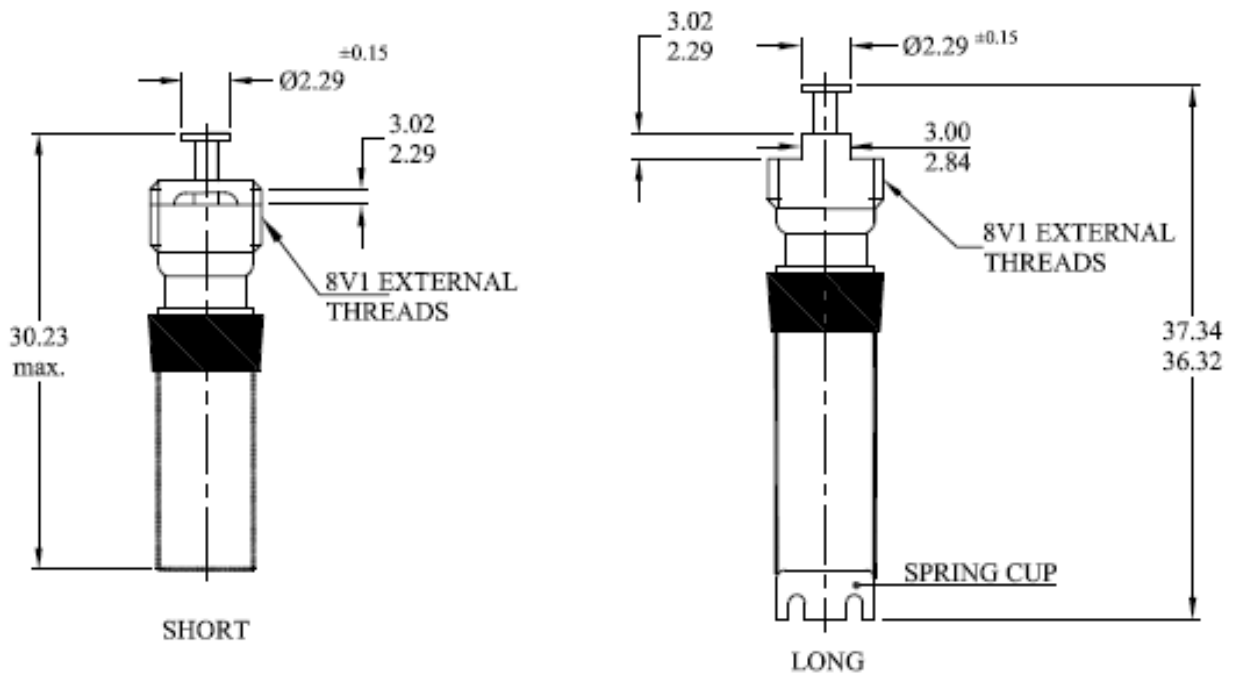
LARGE BORE TUBELESS CLAMP-IN TURRET TYPE VALVES - OTR
